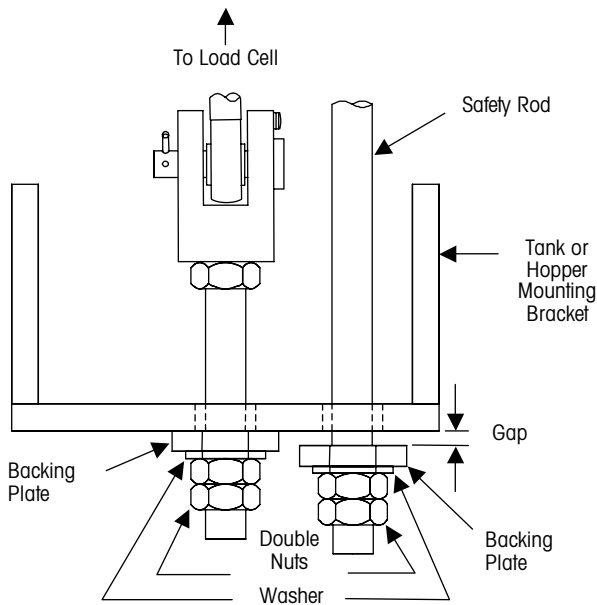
Weigh Module Assembly Attached to Lower Support Bracket
